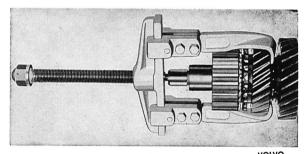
Main shaft disassembly, M  $\,40$
